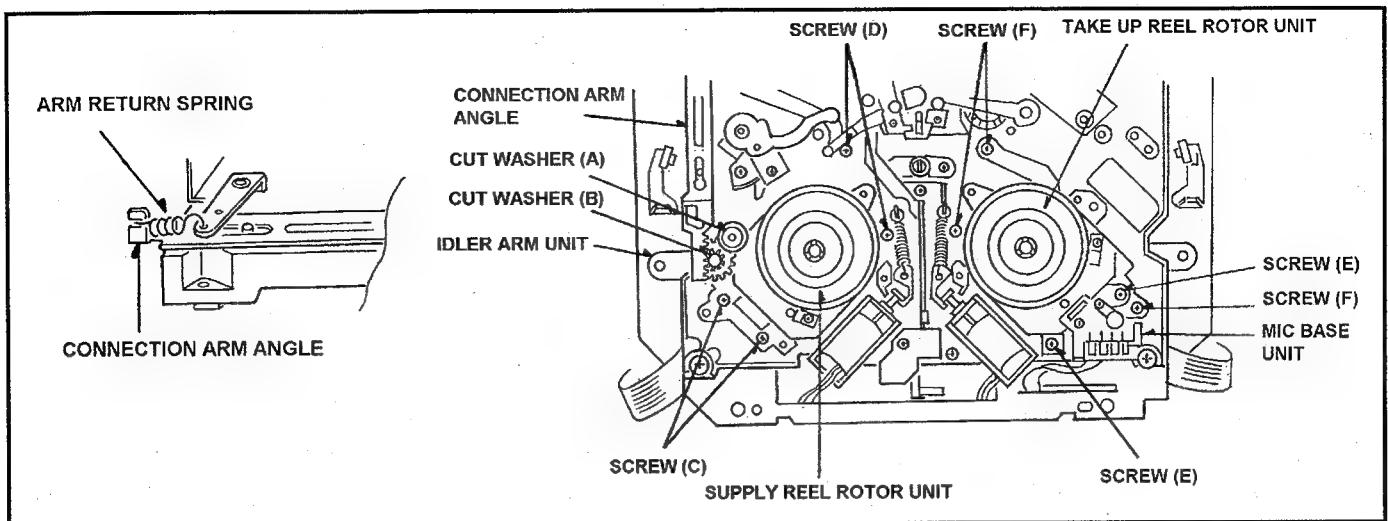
Removal of Supply & Take Reel Rotor Unit
